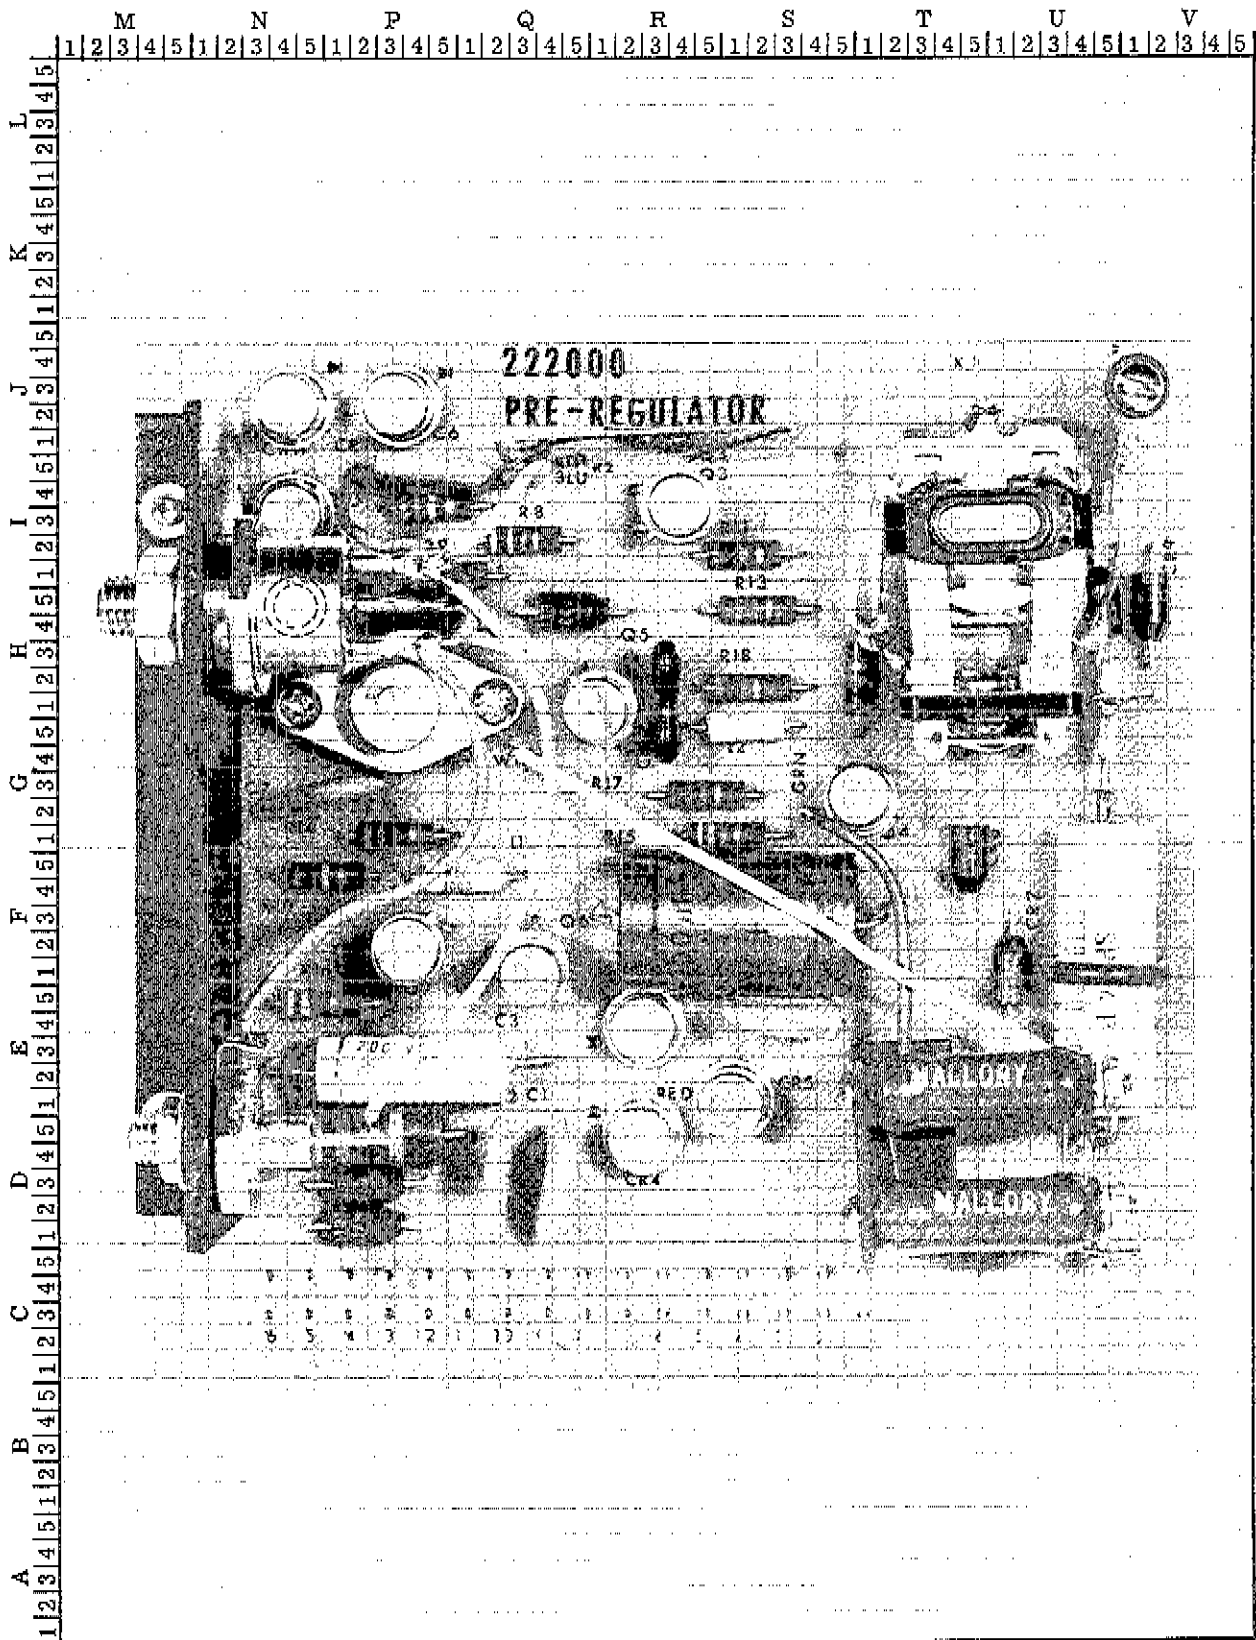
PREREGULATOR P/C ASSEMBLY
